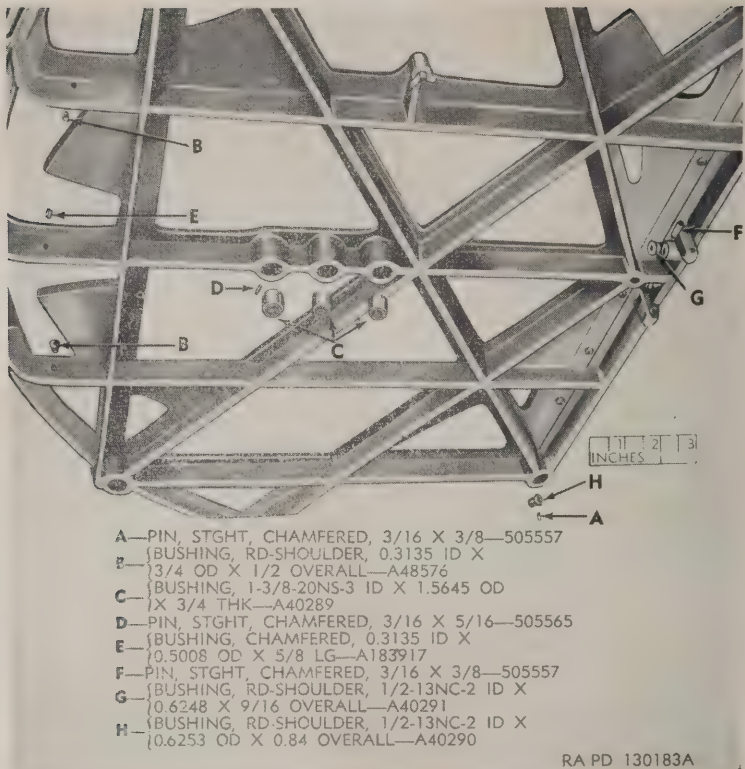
Bottom view of frame assembly—sound-ranging plotting board M1 or M1A1.
